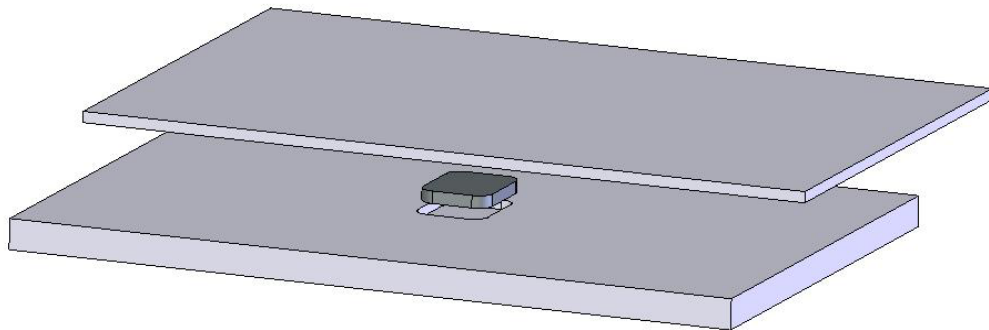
Mg-matrix dispersion fuel pellet assembly construction.
